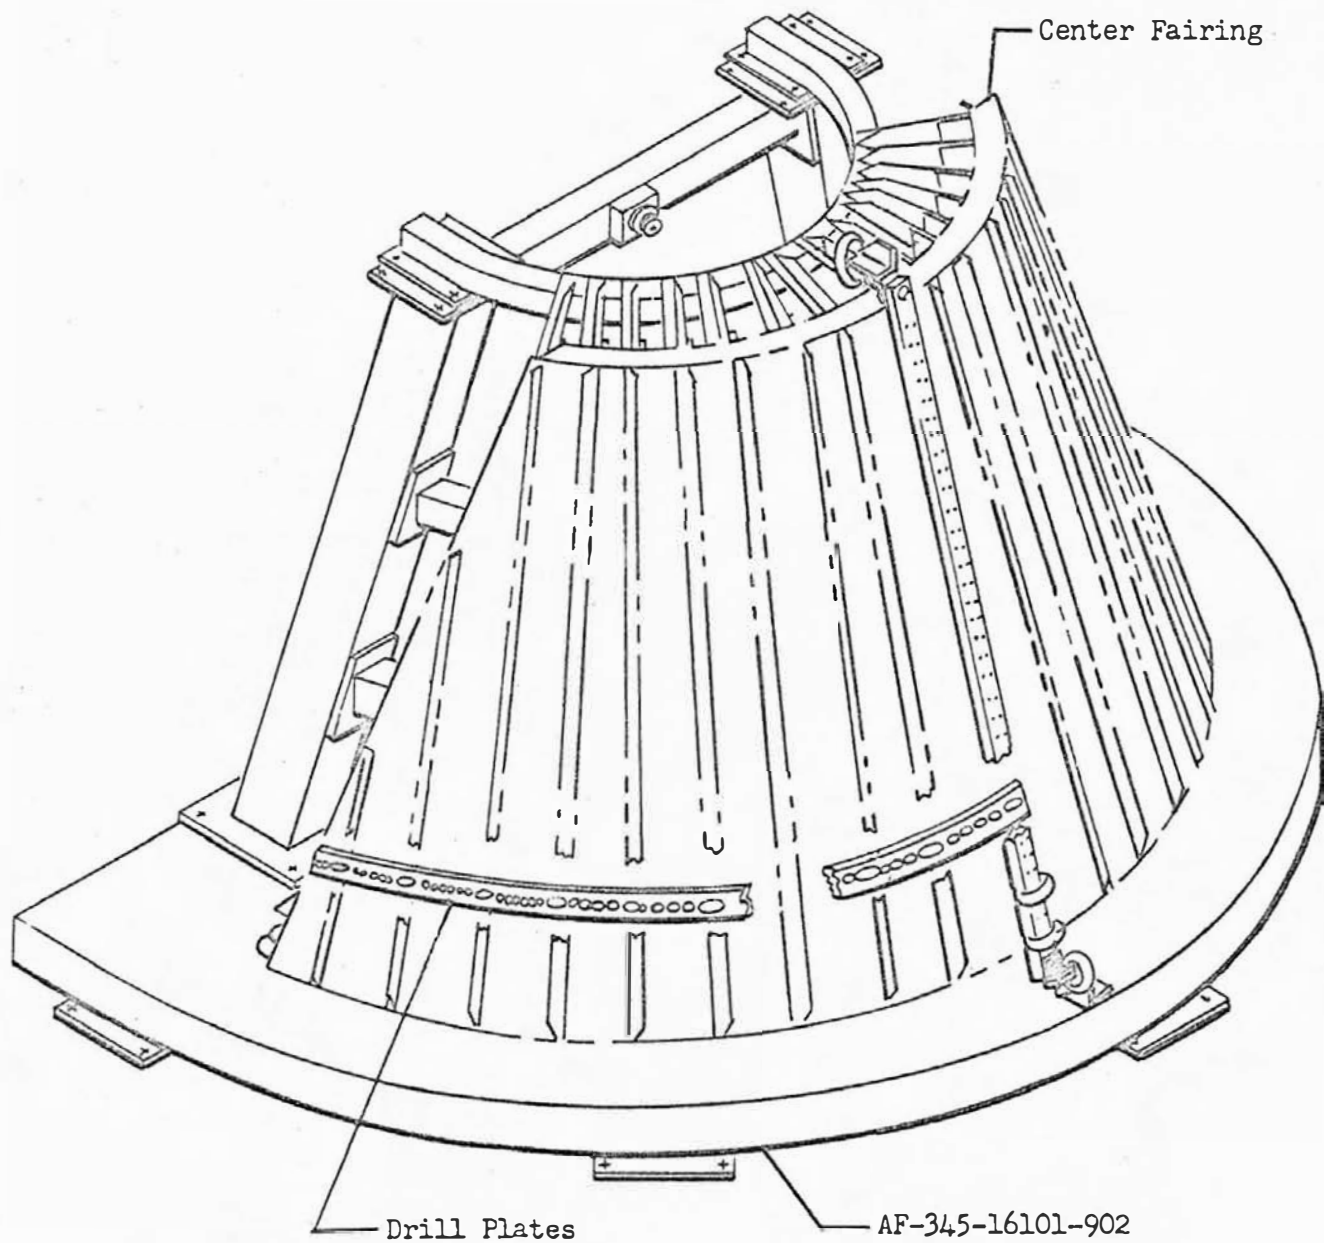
16. Assembly Fixture for Center Fairing Subassembly
